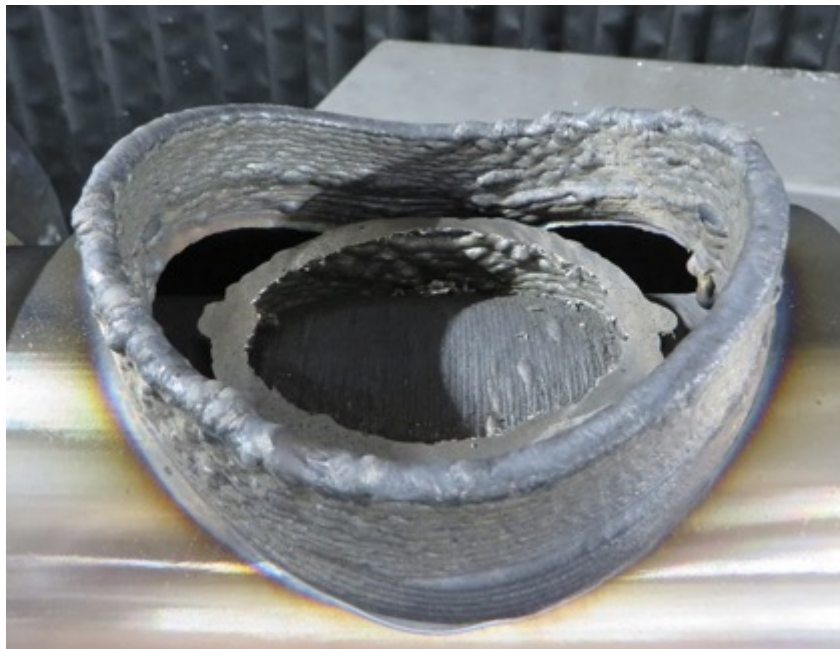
The inner and outer walls of the offshoot tube after printing and machining.
